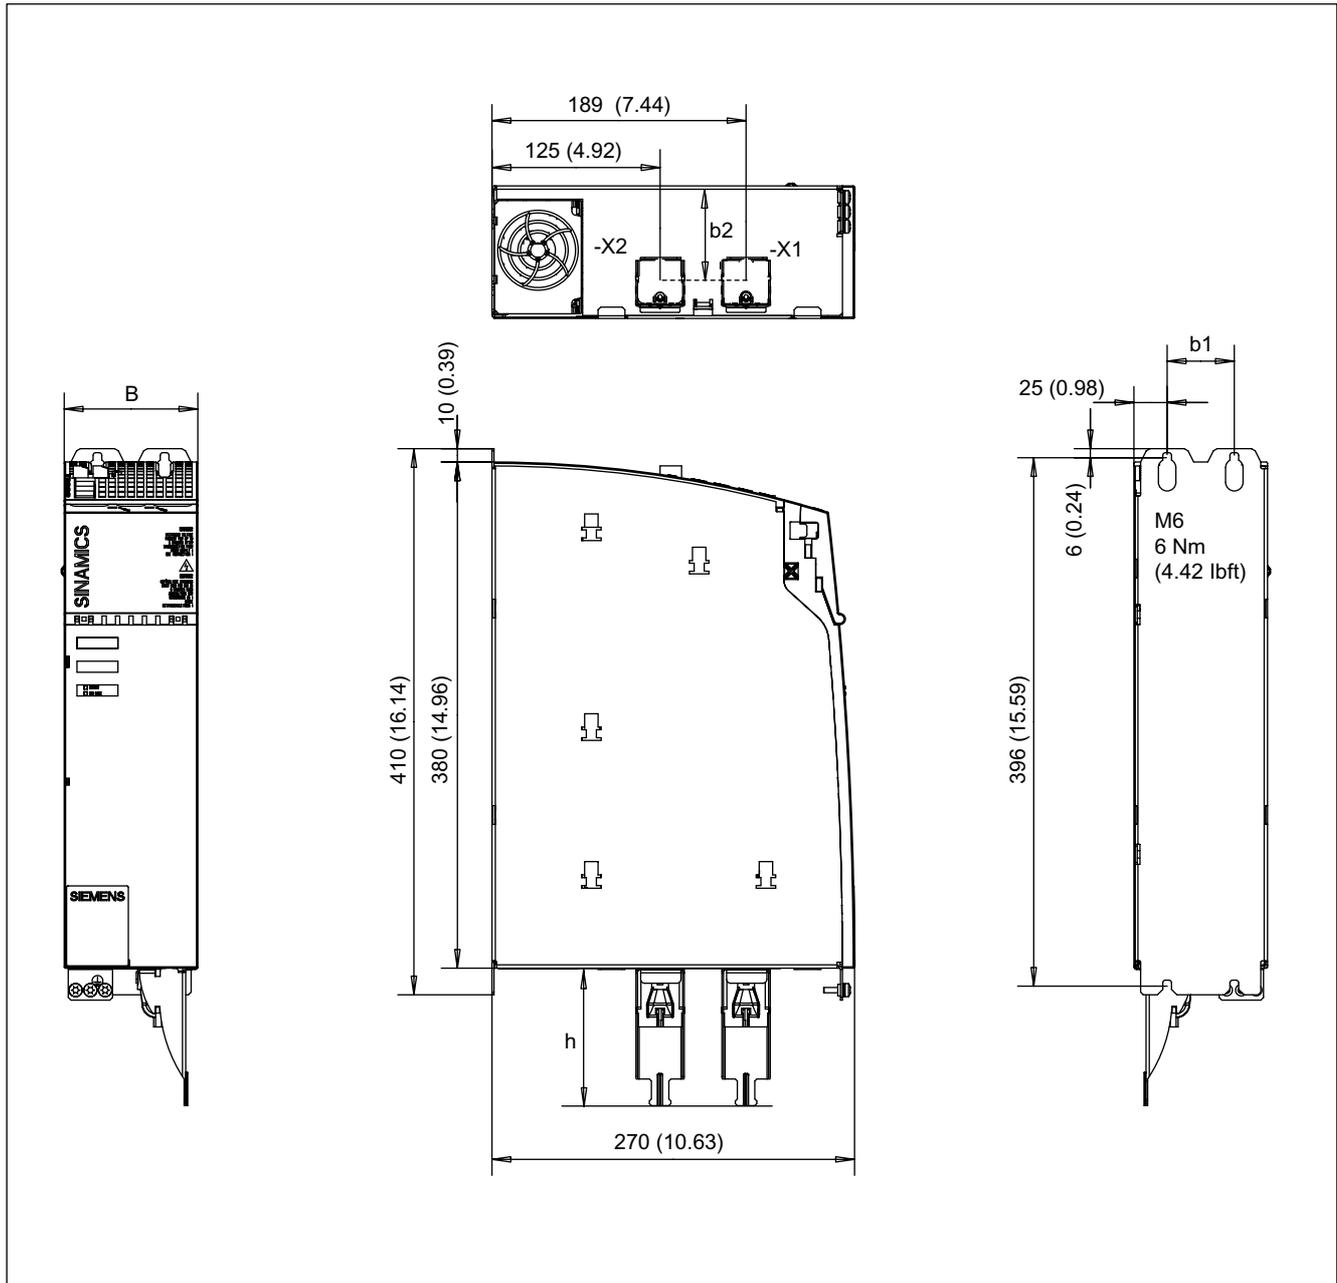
Dimension drawing of Motor Module in booksize format with internal air cooling 30 A and 2 x 18 A, all dimensions in mm and (inches)
